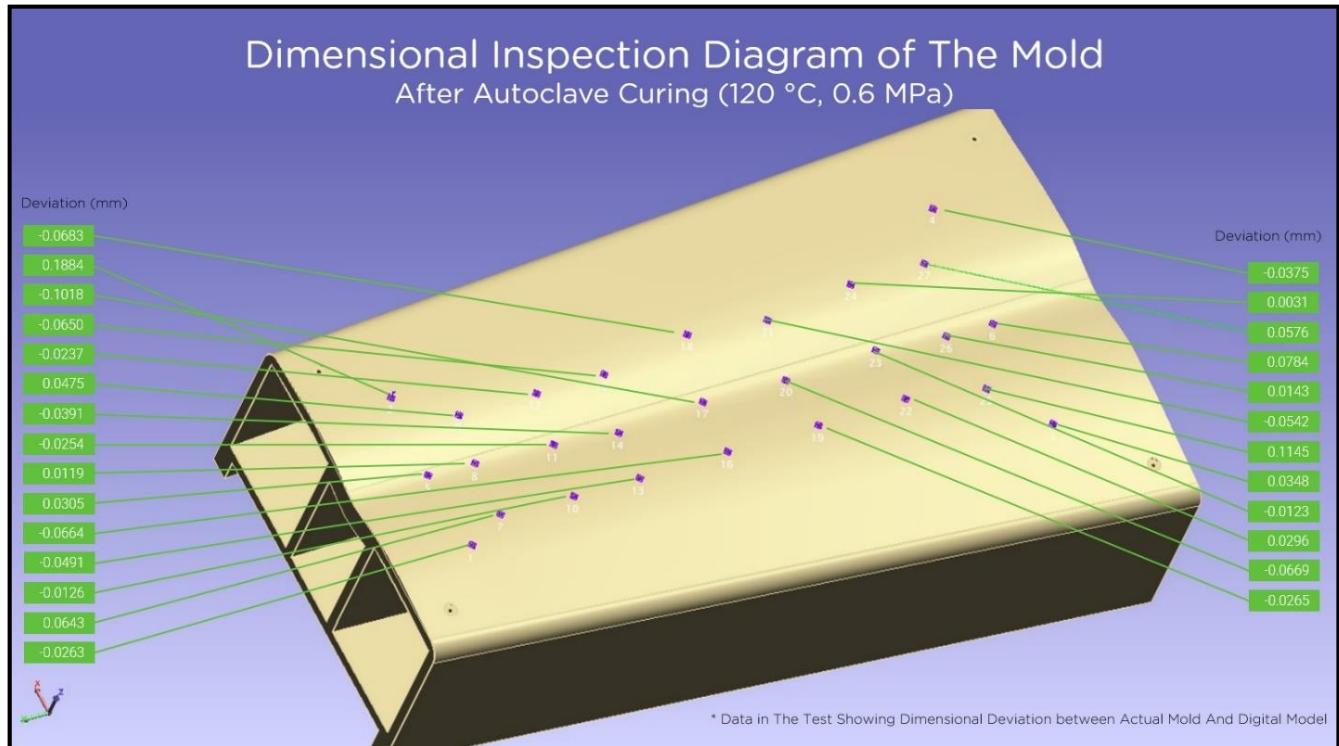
| Dimensional inspection result of the mold after autoclave curing
